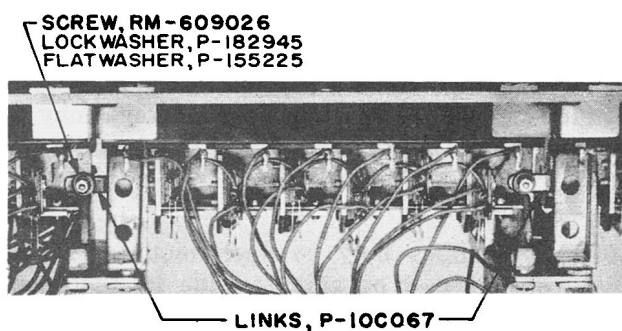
End-to-end Assembly, Mechanical Linkage
